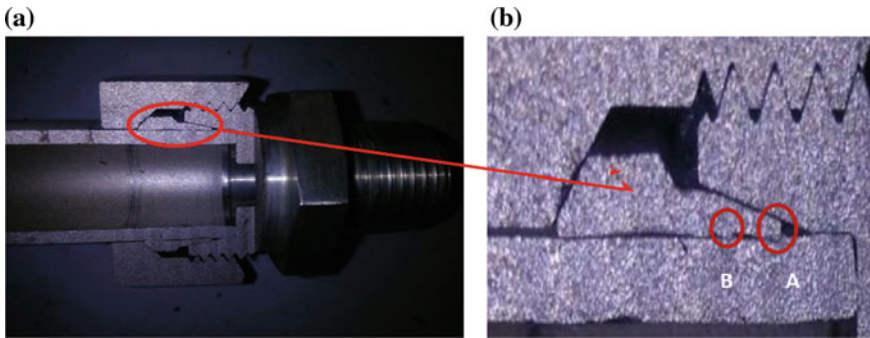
a Swaged ferrule assembly. b Enlarged view of bite condition
